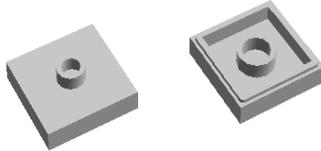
Top and bottom view of a LEGO double jumper plate.
